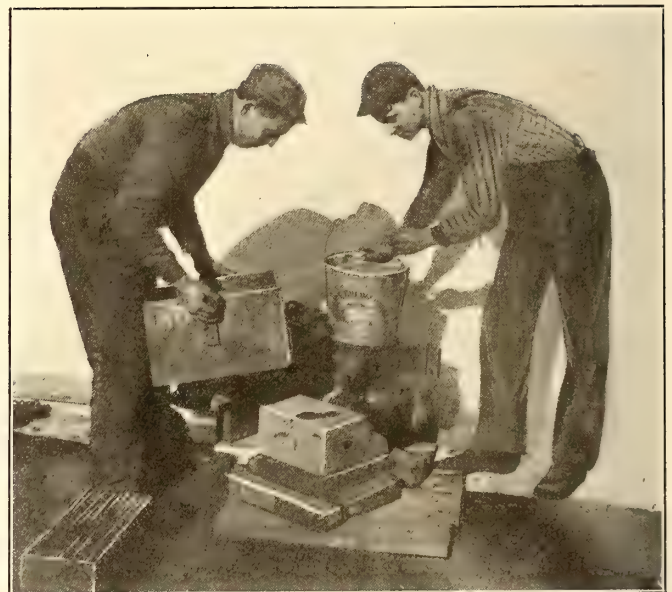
PLACING THE COVER AROUND THE MOLD
